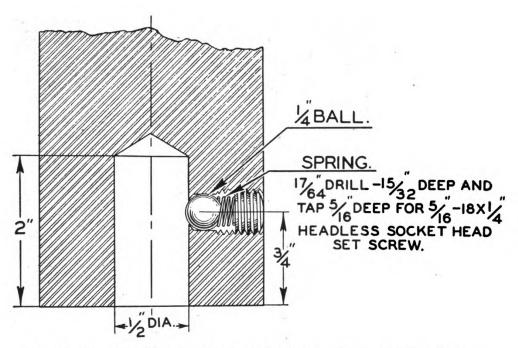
Drawing Showing Method of Adapting Ram of Arbor Press to Retain Case Magneto Tools
